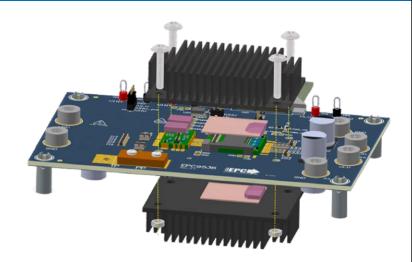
Exploded view of the cooling system assembly with location of the various TIM's
